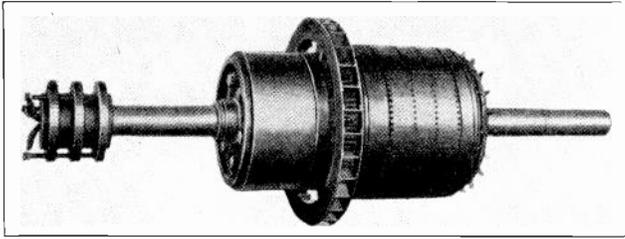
Armature of a BTA motor showing the commutator, slip rings, and ventilating fan. (Courtesy G. E. Company)
